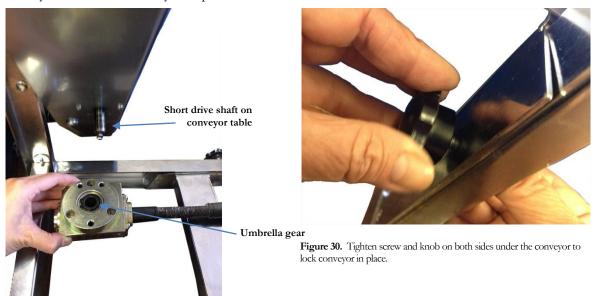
Insert the short drive shaft on the conveyor unto the groove of the umbrella gear.
